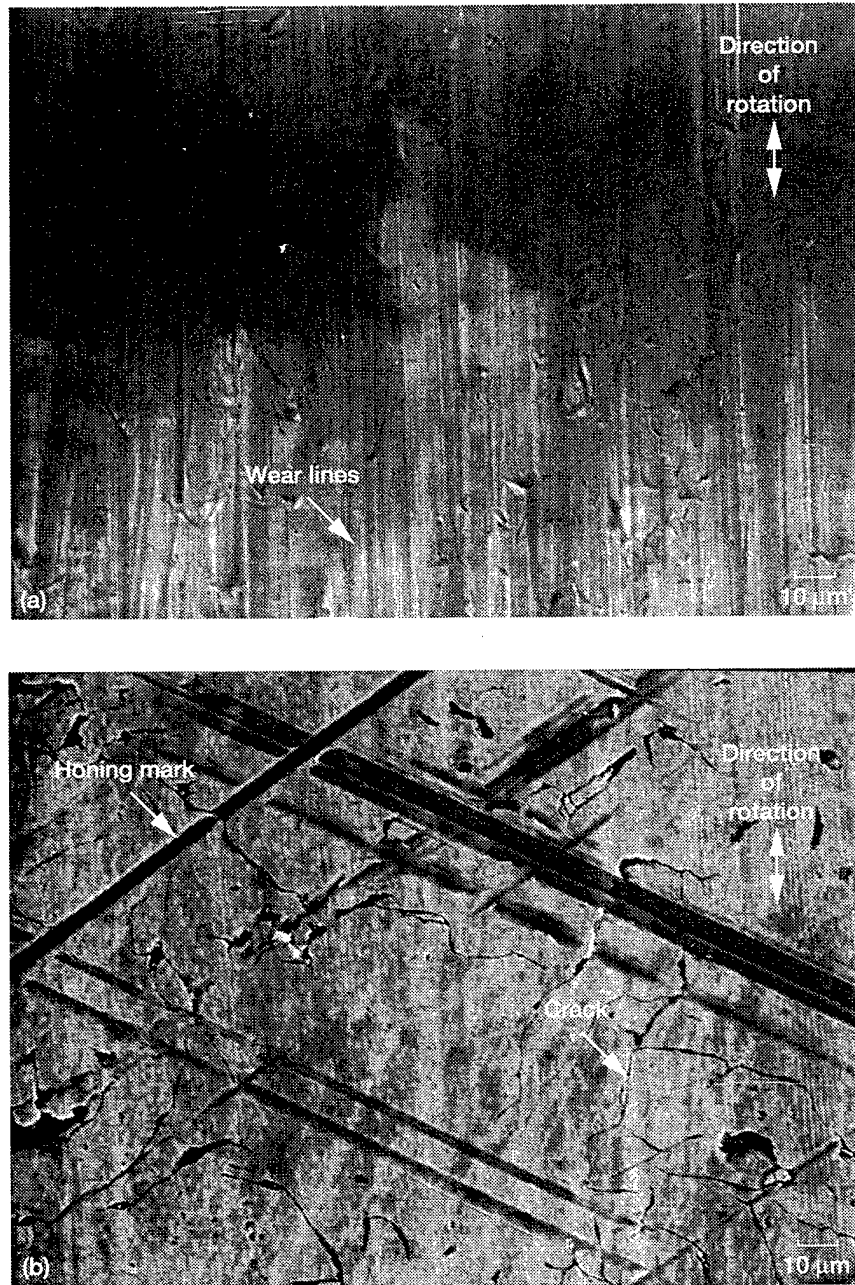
SEM photos of lab test specimens. (a) Ring. (b) Liner.
